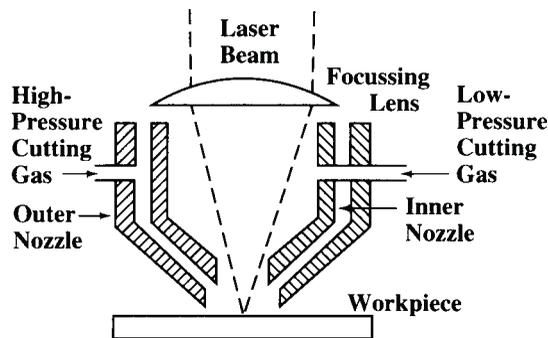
Laser Gas Cutting Nozzle for Steel.
